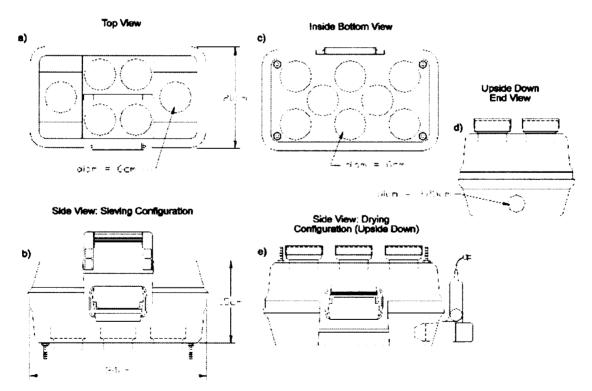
Diagram of constructed combination sieving and drying apparatus: (a) six 6-cm viewing holes in top of trunk-style tackle box; (b) side view of sieving configuration with sieves; (c) inside bottom view of tackle box showing eight 6-cm sieve holders; (d) upside-down end view of tackle box showing insertion hole for hair-dryer; (e) side view of tackle box showing drying configuration with sieves and hair dryer.
